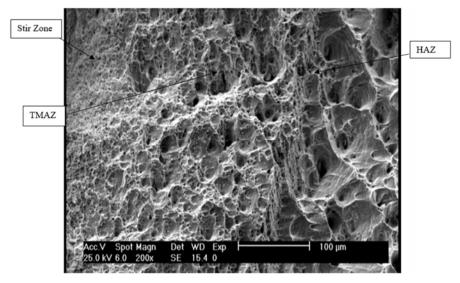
Fracture appearance regarding the SS316 side of FSWed specimen after tensile testing. The left side is close to stir zone
